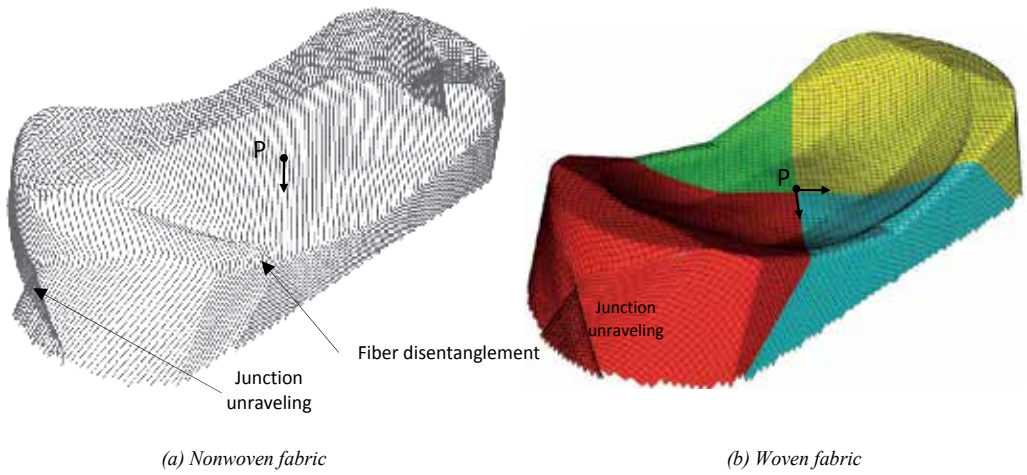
3D geometrical draping using UD fabric and woven carbon fabric
